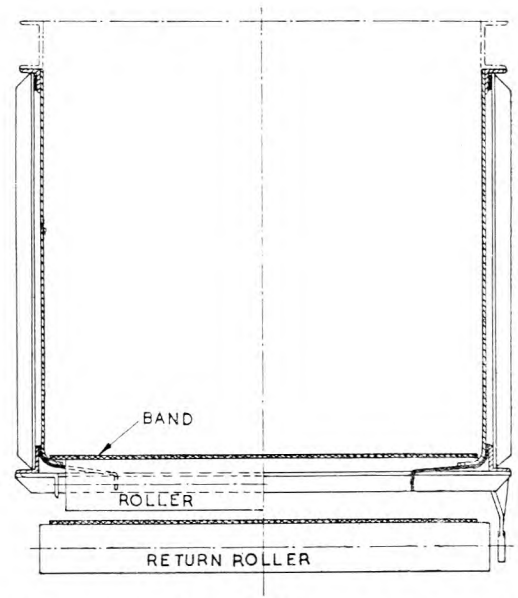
SECTION OF LOADING PLATFORM CONVEYOR BELT. and others being fitted with ball bearings. Adjustable rollers are fitted at the ends of the bands to permit adjustment to the alignment of the bands. The width and speeds of the belts, depth of the troughs, and other relative information is given in Table I.
